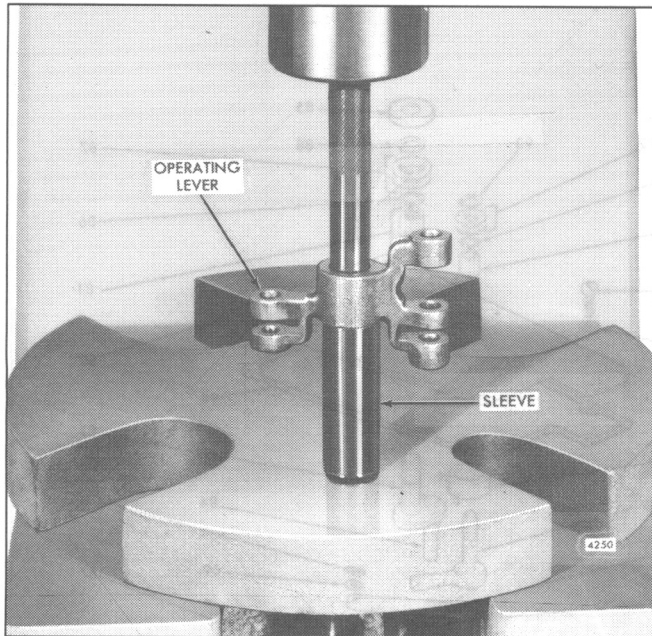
Removing Operating Lever Needle Bearings using Tool J 8985
